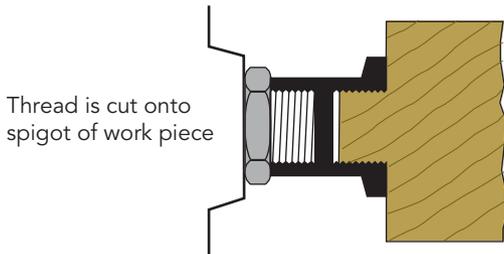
Screw cup chuck; note locating shoulder on chuck
